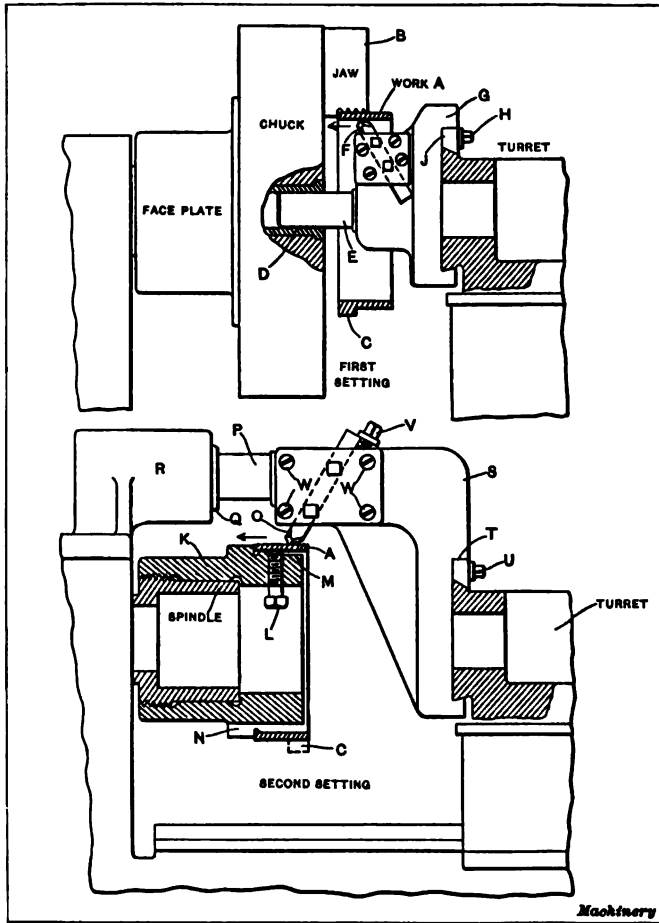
Machining a Thin Steel Casting on a Horizontal Turret Lathe
